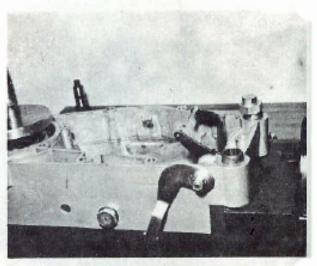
Remove the nut from the clutch release shaft and take out the complete assembly.
